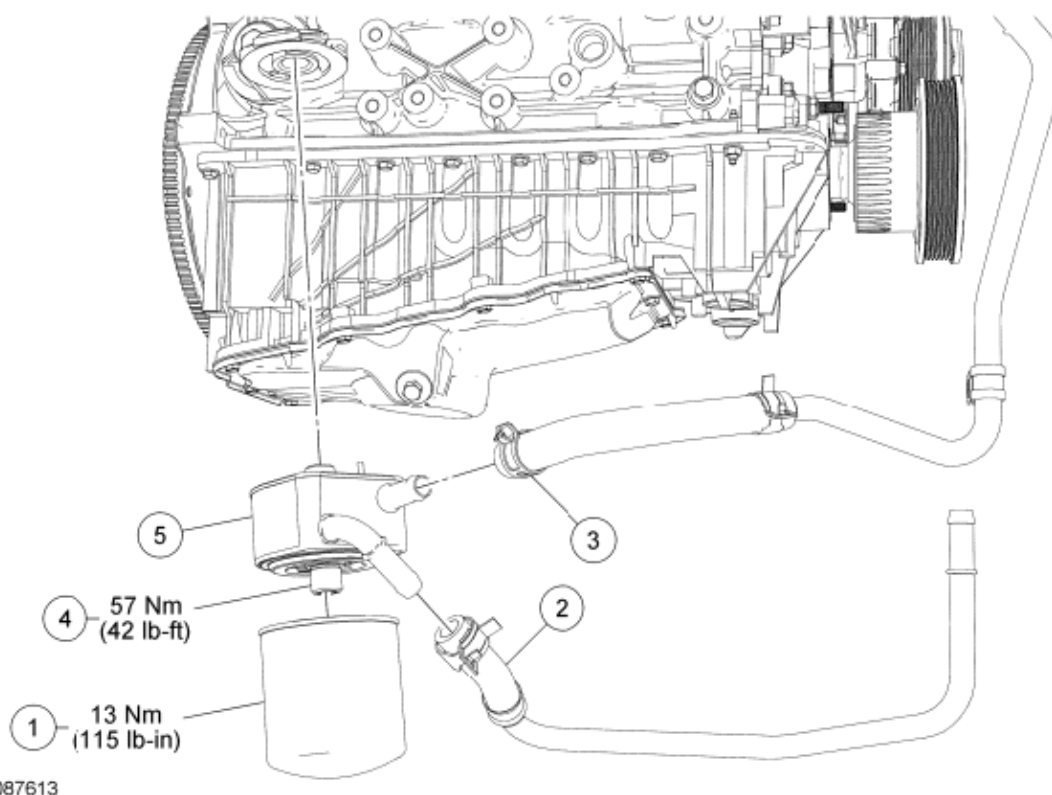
Identifying Oil Cooler Components With Torque Specifications
